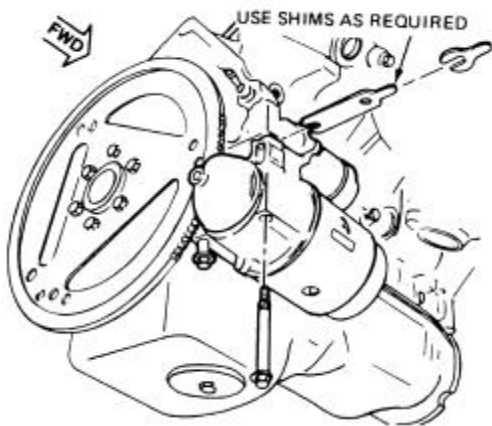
Be careful when lowering the starter, because it is heavier than it looks!
